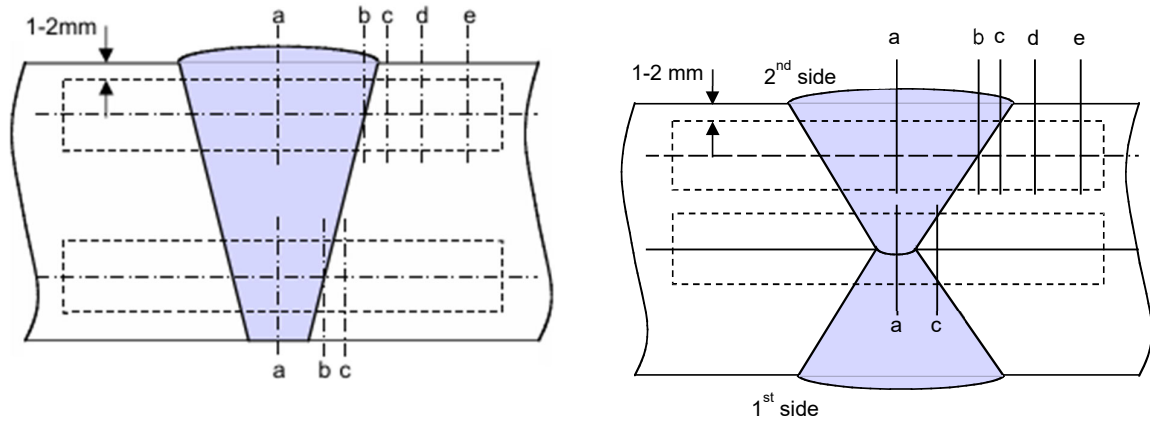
Locations of V notch for butt weld of high heat input
